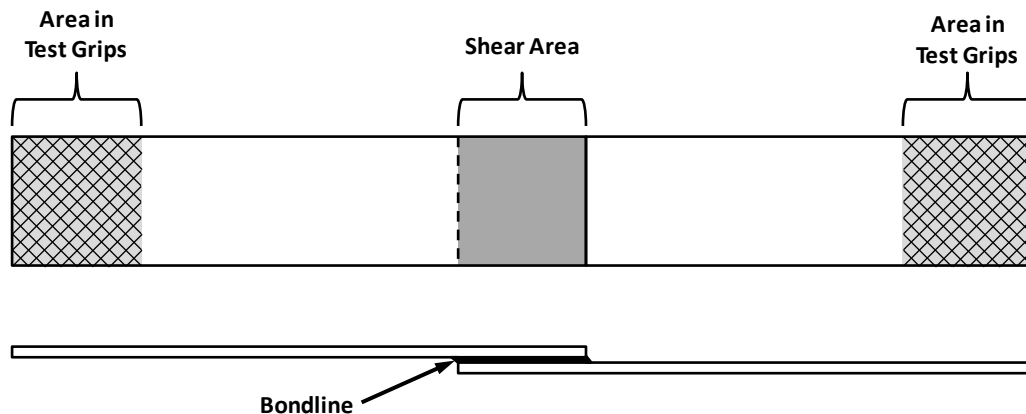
Illustration of the adhesively bonded single-lap-joint test specimen configuration (refer to ASTM D1002-10 for dimensions).
